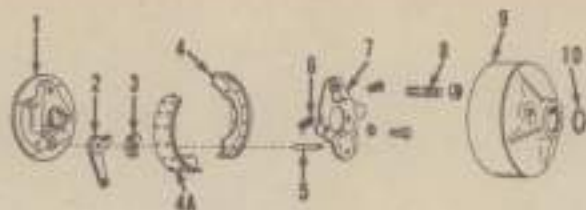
Exploded view of the D-14 & D-15 brake assembly. Brake adjustment is accomplished by adjusting the length of the brake rods.
